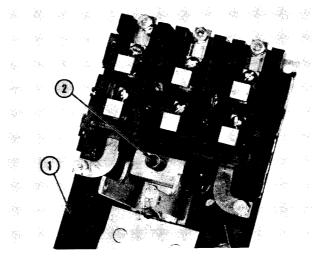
BAR MAGNET AND ARM REMOVED 1. Base 2. Spring
